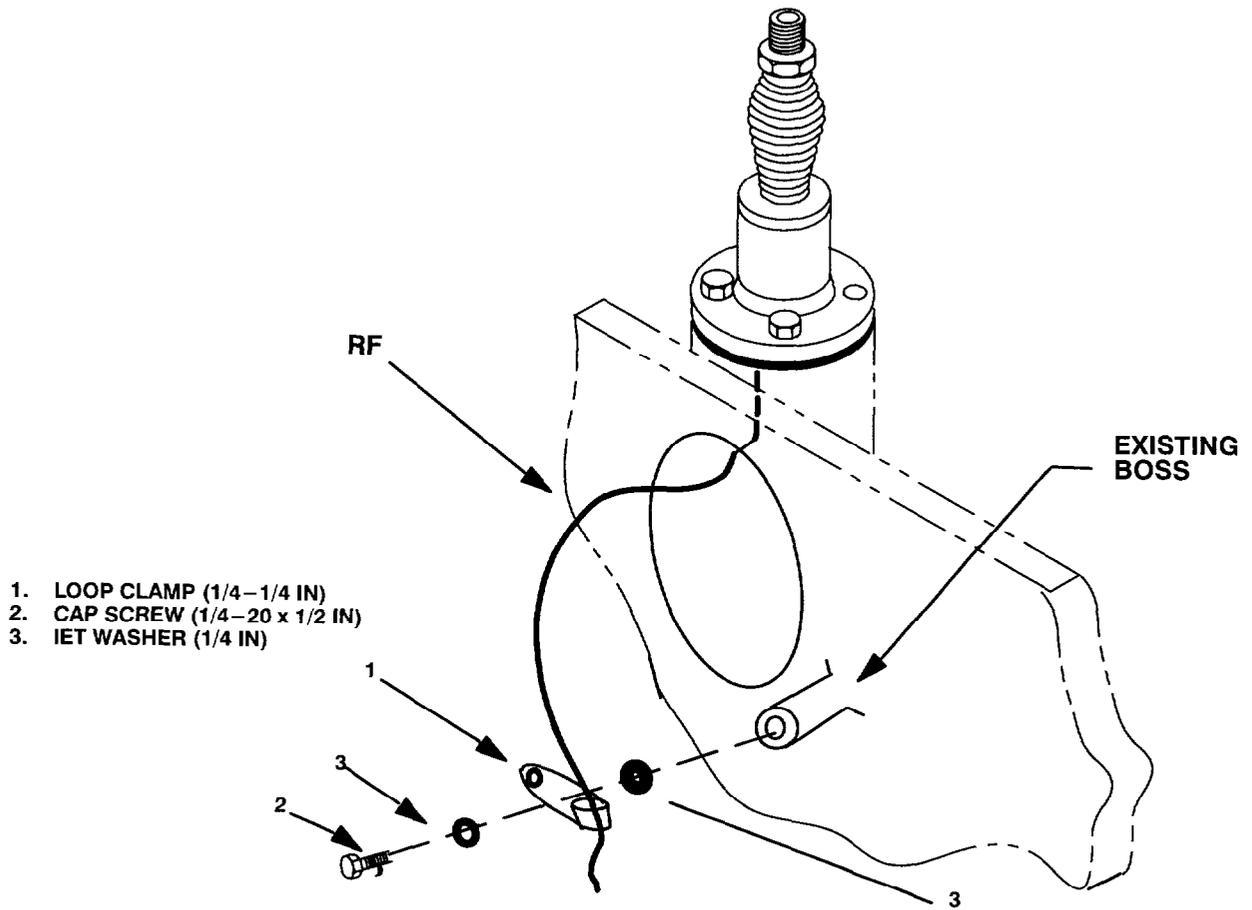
(3). Cable Installation: Loop Clamp Installation
